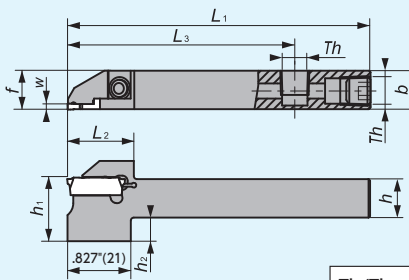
• Left-Hand holders are designed for Right-Hand machines
